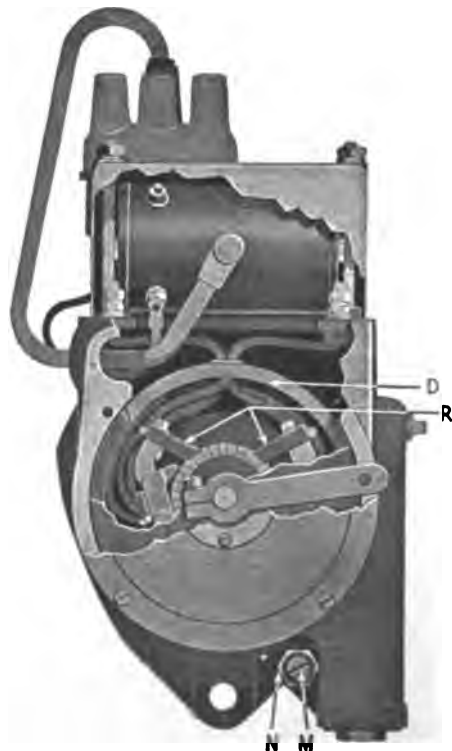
B—End view of generator on Remy apparatus used on the Moline-Universal tractor
